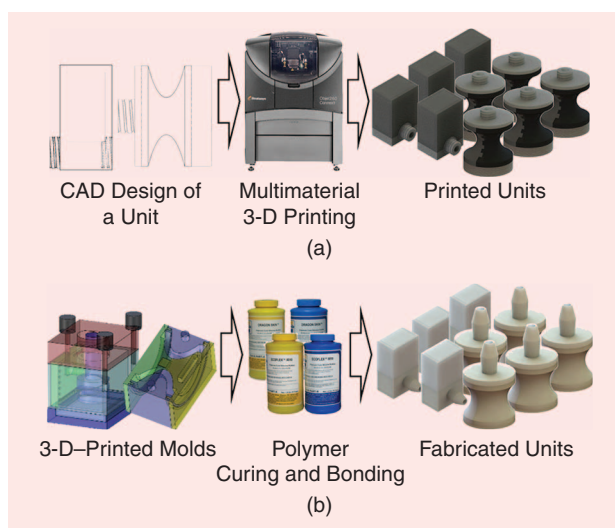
The schematic diagrams of fabrication methods: (a) multimaterial 3-D printing and (b) molding and casting with silicone-based polymers. (3-D printer image courtesy of Stratasys, Ltd. Polymer bottle image courtesy of Smooth-On, Inc.)
